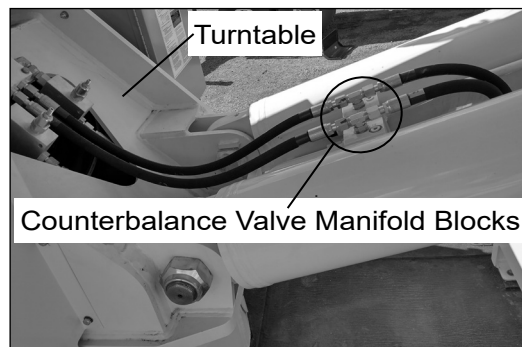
Locating Counterbalance Valve Manifold Blocks
